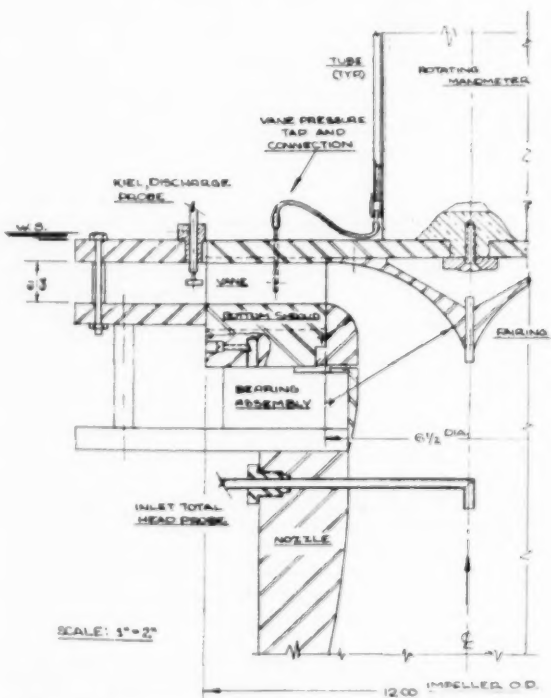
IMPELLER ASSEMBLY SHOWING INSTRUMENTATION
